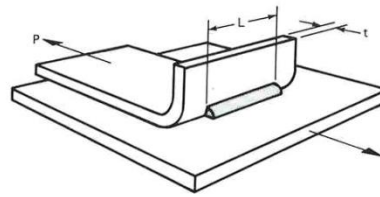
A — Single Flare-Bevel Groove Weld (See 2.2.5(1))
